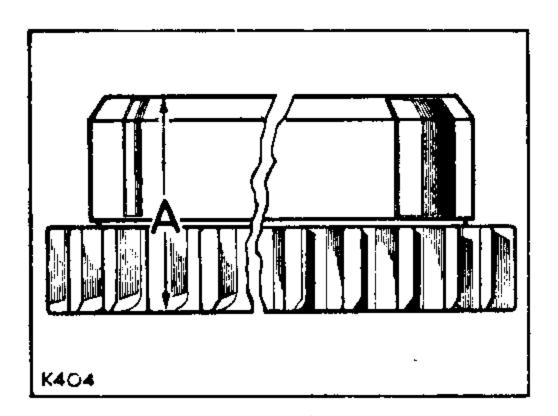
Machining flywheel A-Minimum thickness after refacing
